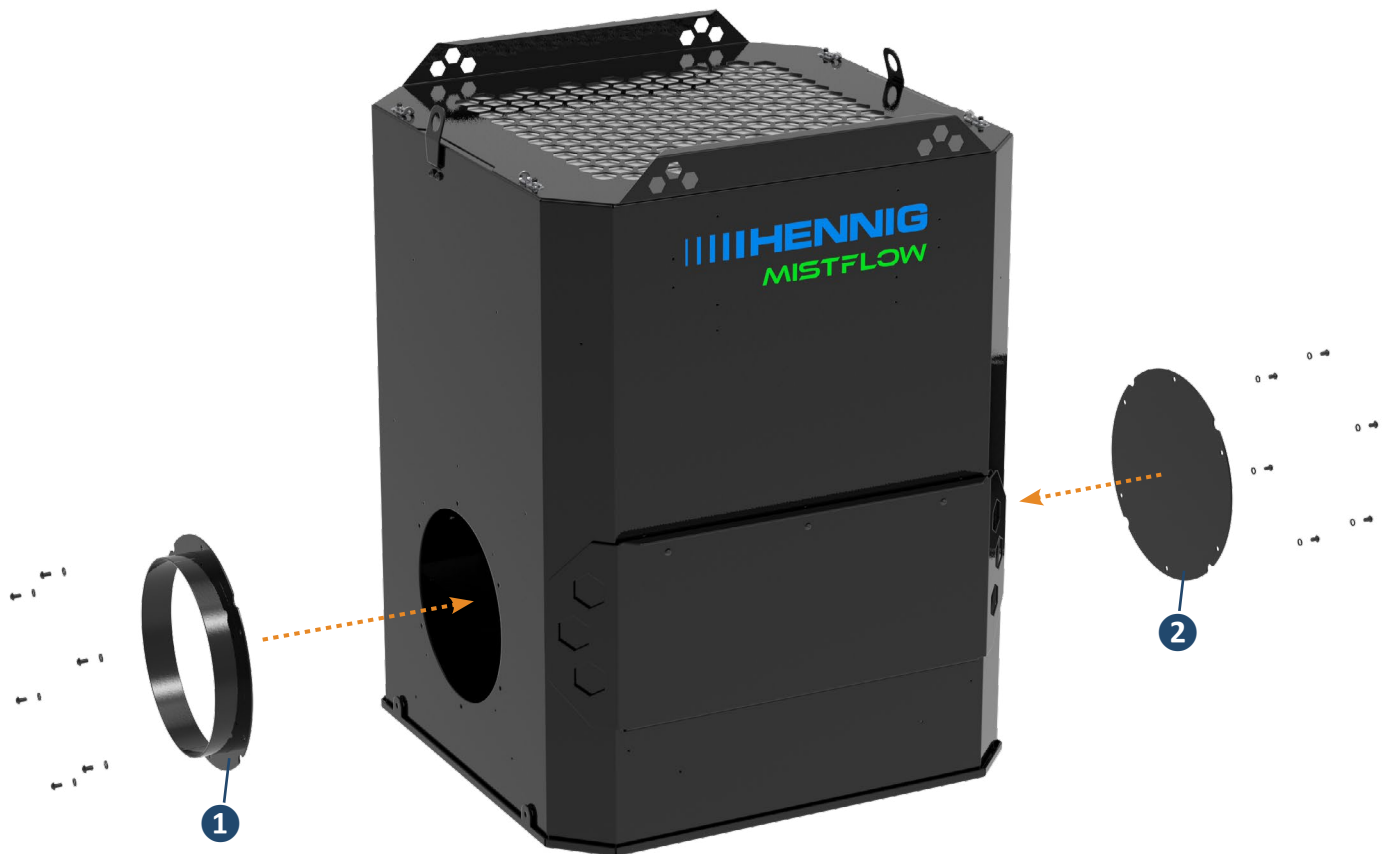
Installing the hose flange and cover plate on the MistFlow
